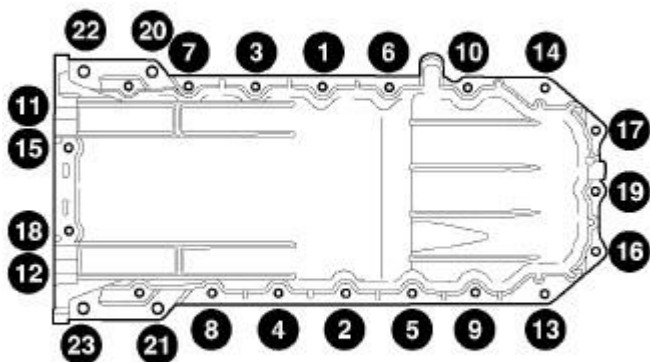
Oil Pan Bolt Removal/Installation Sequence
